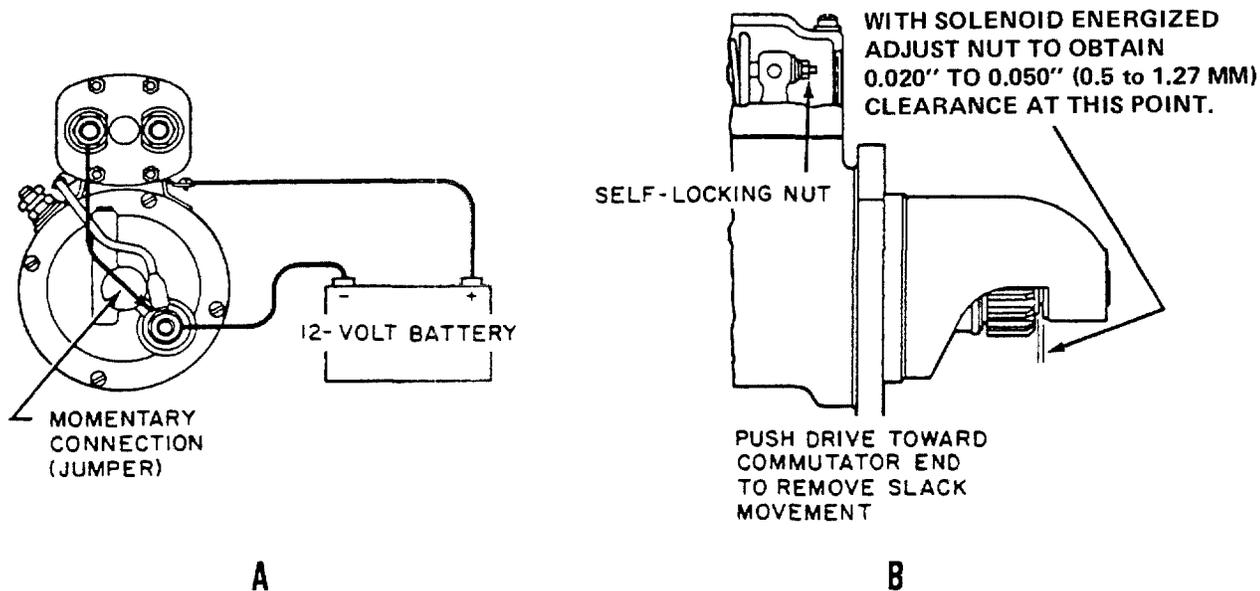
Starter Drive Assembly, Pinion Clearance Adjustment
